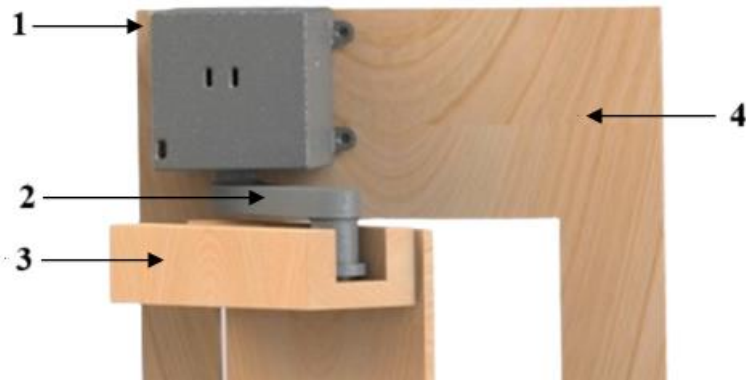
Final Assembly: 1 - Housing, 2 - Opening arm, 3 - Slide attached to the door, 4 - Door frame
